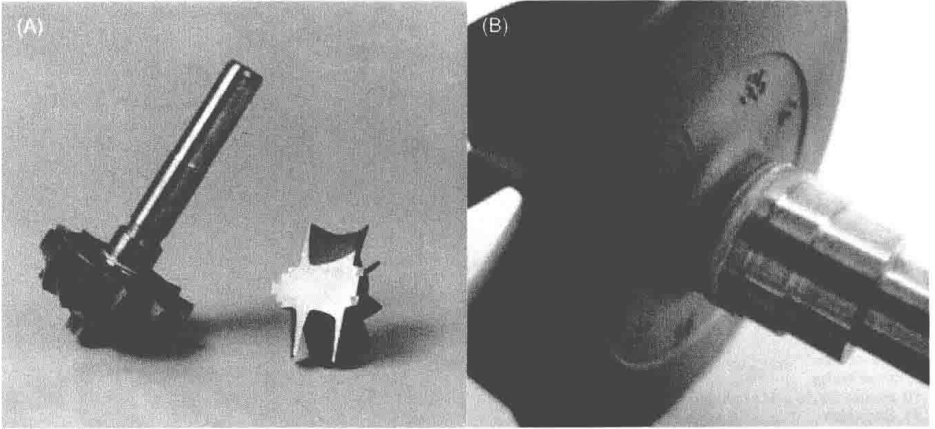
(A) Turbocharger impeller made of carbon steel (shaft) and Inconel (impeller). (B) Magnified view of the weld between shaft and impeller (http://hwww.ptreb.com/industries/automotive/turbocharger_impeller_welding/, accessed on 30.11.14).
